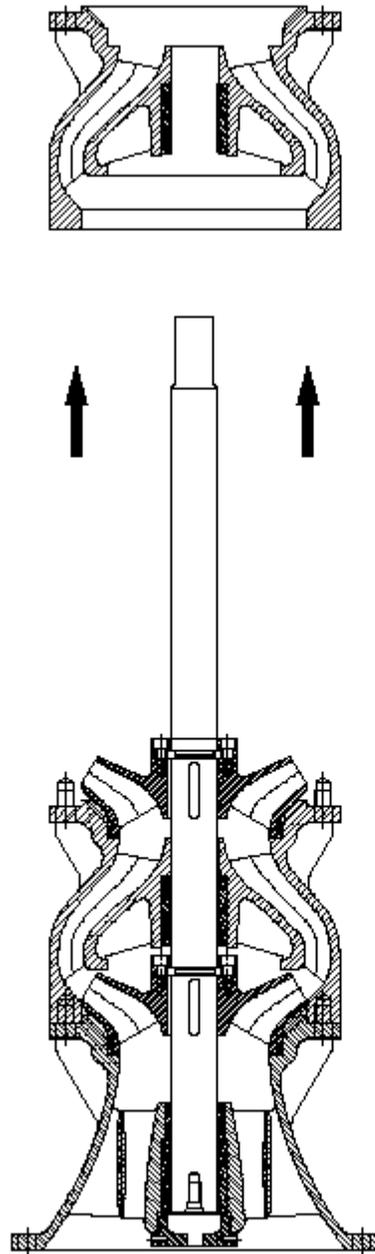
DIS ASSEMBLY OF BOWL ASSEMBLY.
